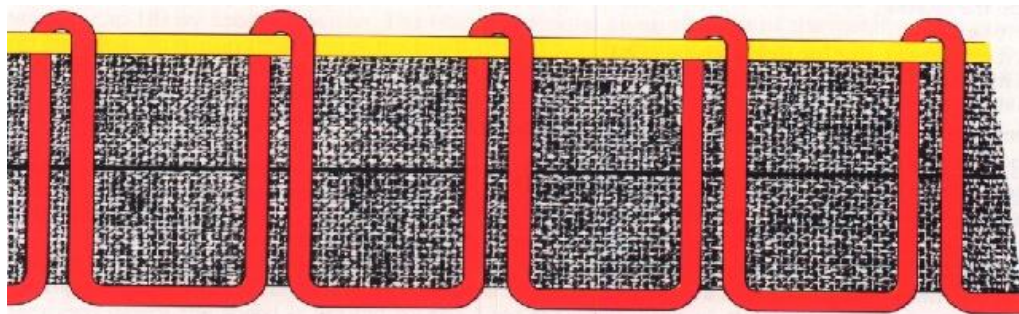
Stitch slack on top caused by the bobbin tension too slack and the top thread tension too tight.
